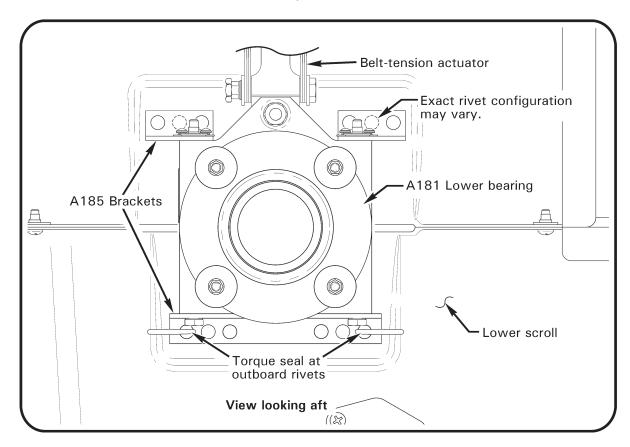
D ACTUATOR LOWER BEARING A185 BRACKETS
